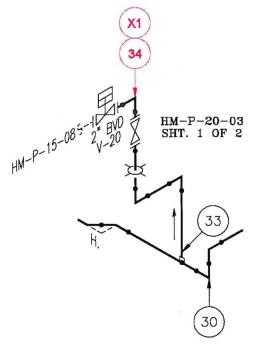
A partial view of isometric drawing HM-P-20-03, sheet 1 of 2. The location of profile radiography (X1) is shown in red.
